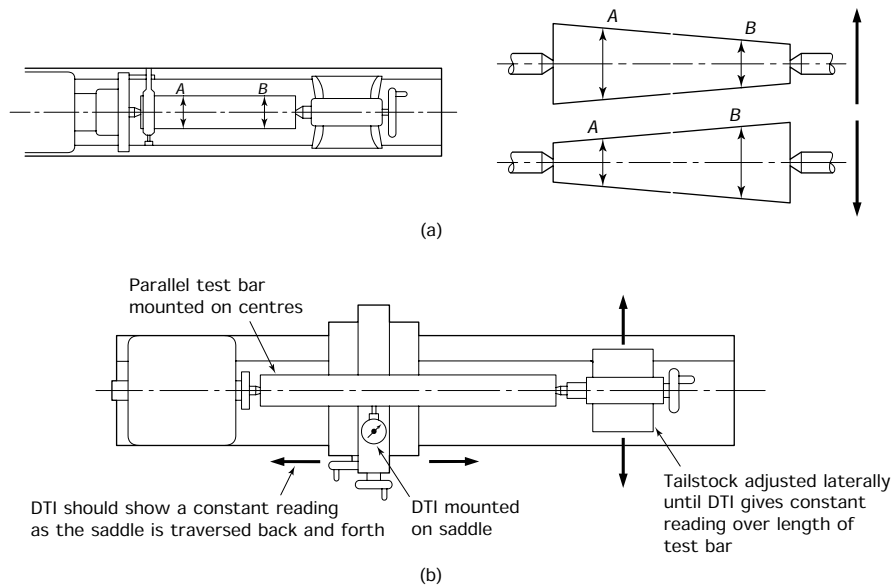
Parallel cylindrical turning: (a) the axis of the headstock spindle must be in alignment with the tailstock barrel axis; if this is so the diameter A will be the same as diameter B; (b) use of test bar
